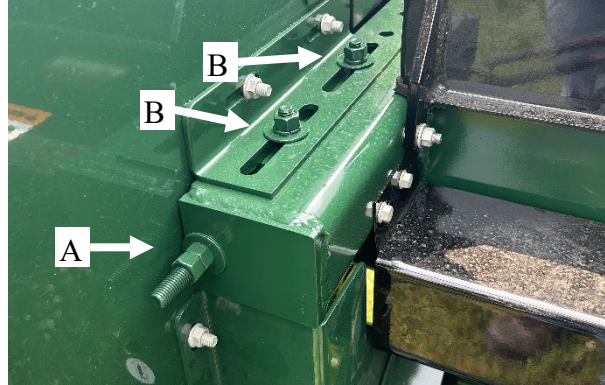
Belt Replacement – Drive Sheave and Bearing Mount.
